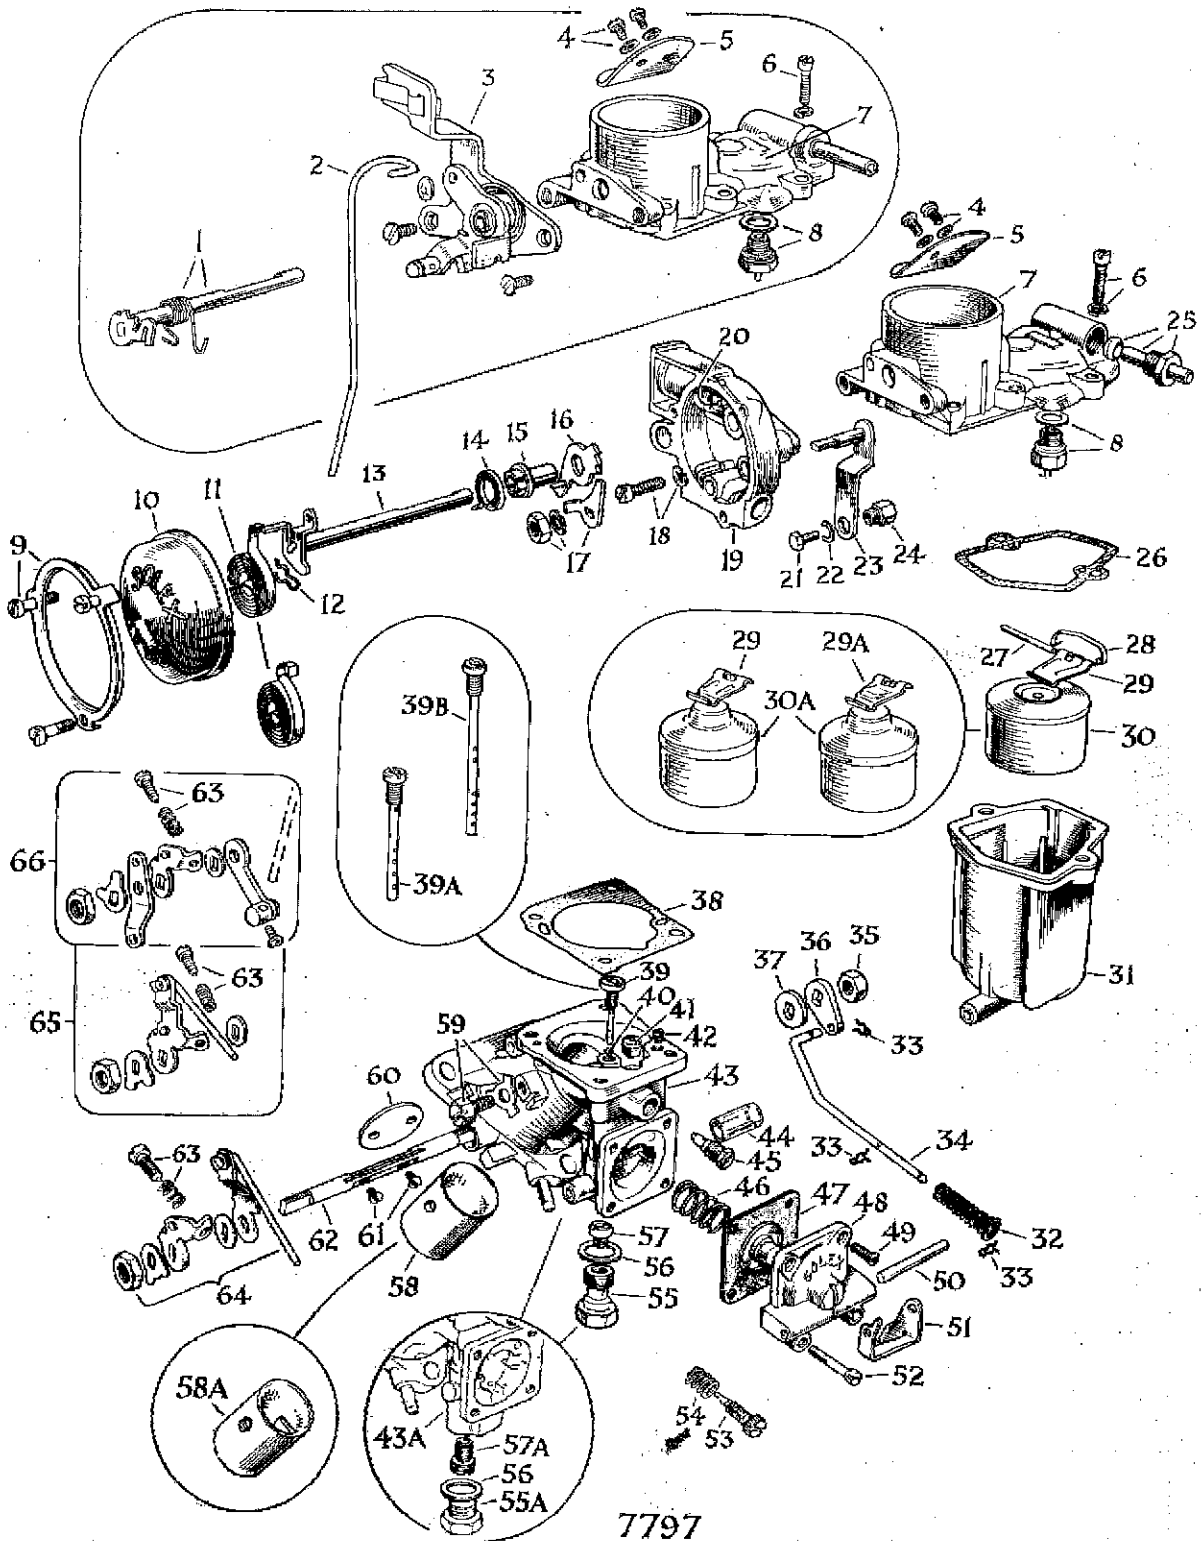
Solex B30 PIHT, B30 PIHT-2, B30 PIHT-3 and B30 PIH-5 carburettors—exploded view
